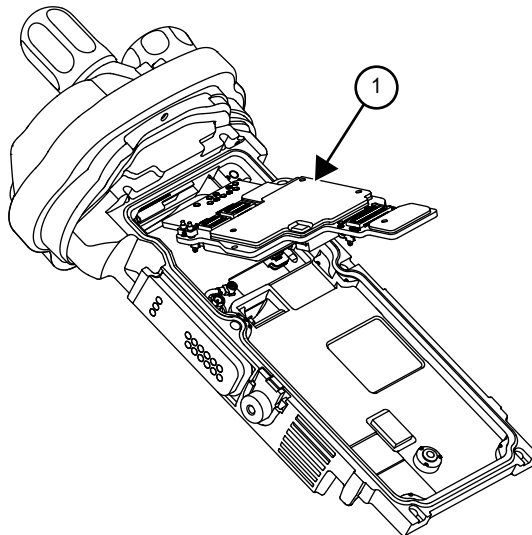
Remove VOCON Board Assembly - APX 8000XE
